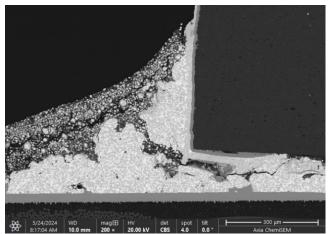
Cross-section of the solder joint formed at 125°C from supercooled liquid metal BiSn-based microcapsules.
